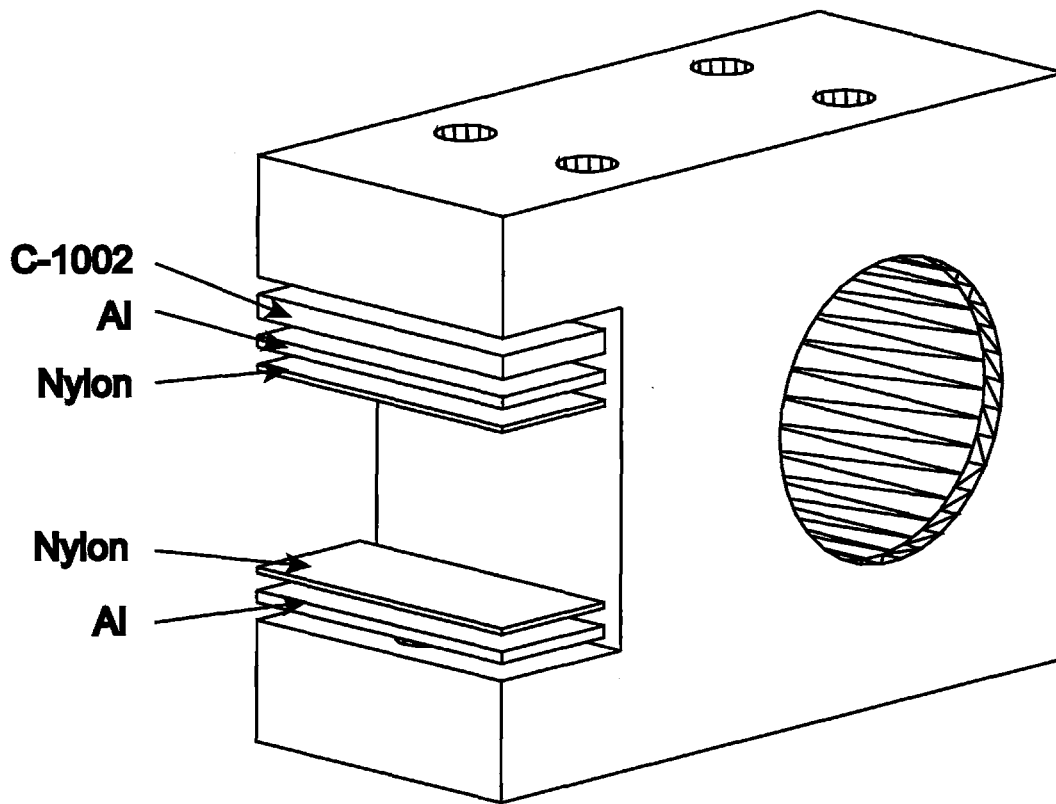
Prototype 1: view showing catamaran bearing preload mechanism
